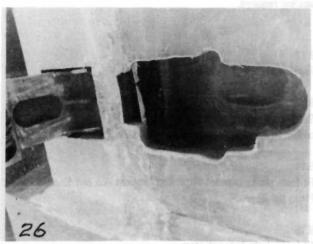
Wheel well cavity. Note aileron cable work protection and brake cable.
